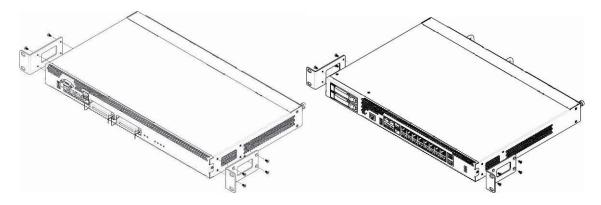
Support brackets mounting for SMG-1016M (left-hand side) and SMG-2016 (right-hand side)
